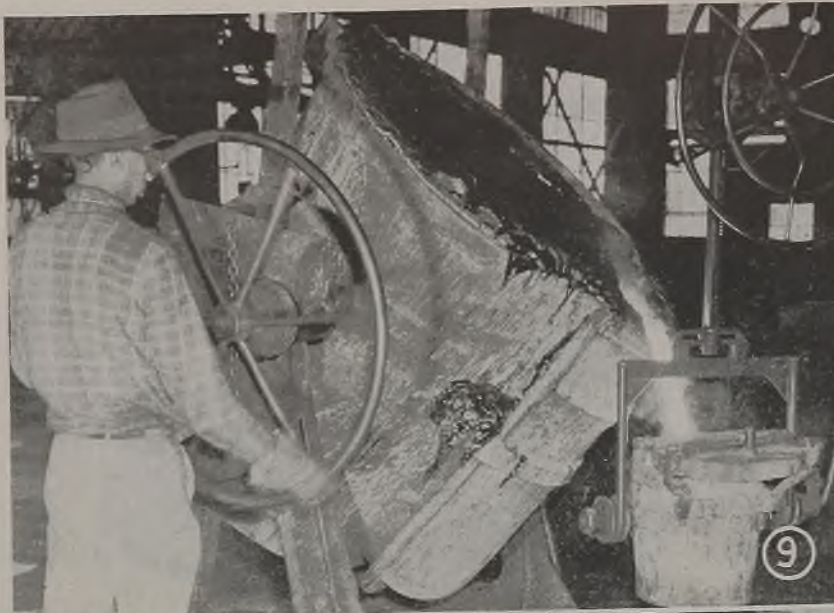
Pouring from large ladle into monorail conveyed shanking pot for squeezer molds
